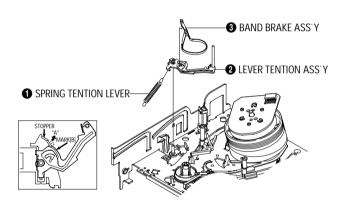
Lever Tension Ass'y, Band Brake Ass'y Removal
